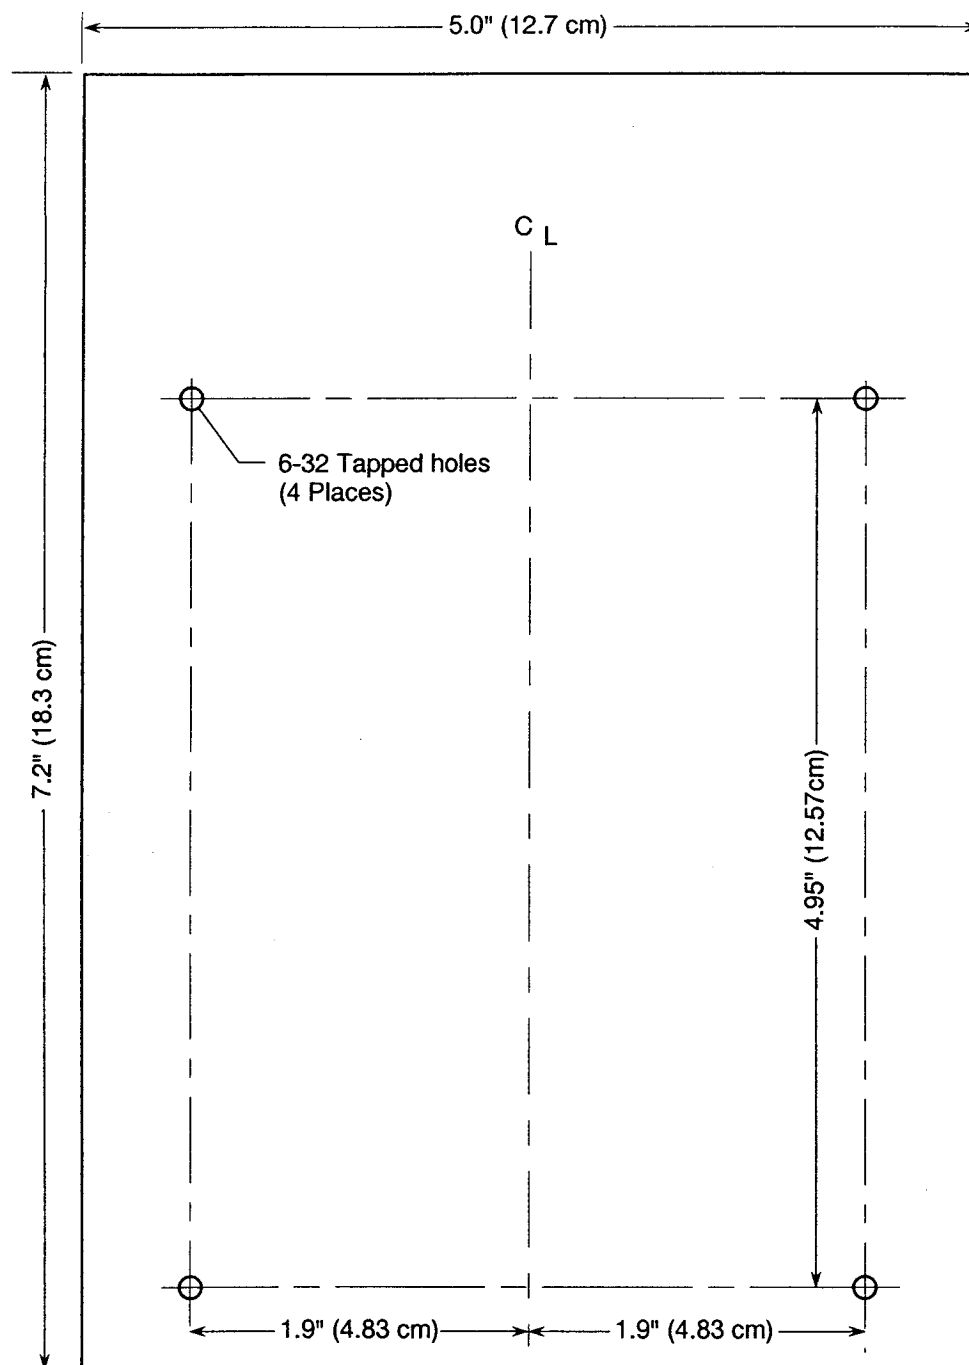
MS-4280 Bottom Mounting Holes (not true size)
